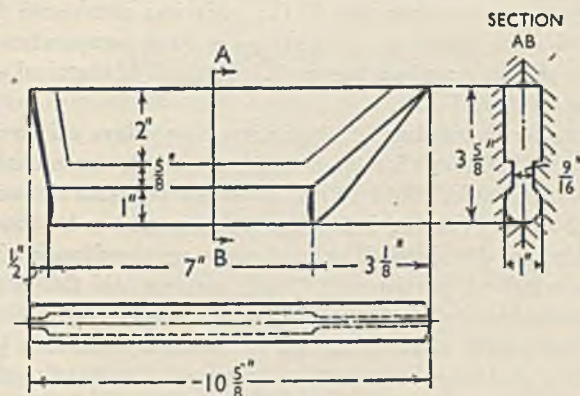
Cast Iron Mould. Minimum wall thickness, $1\frac{1}{4}$ in.
